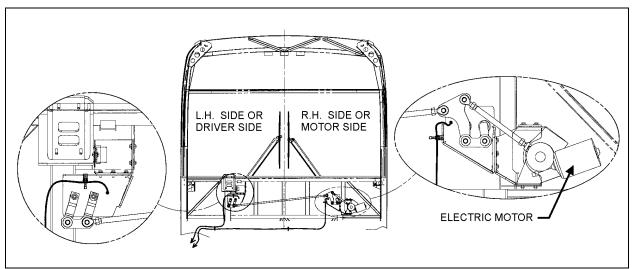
WINDSHIELD WIPER INSTALLATION
